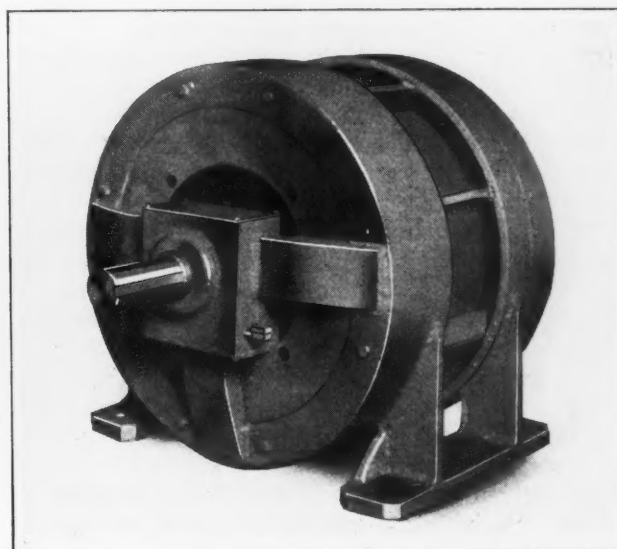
Welded Bracket on an All-welded Motor
